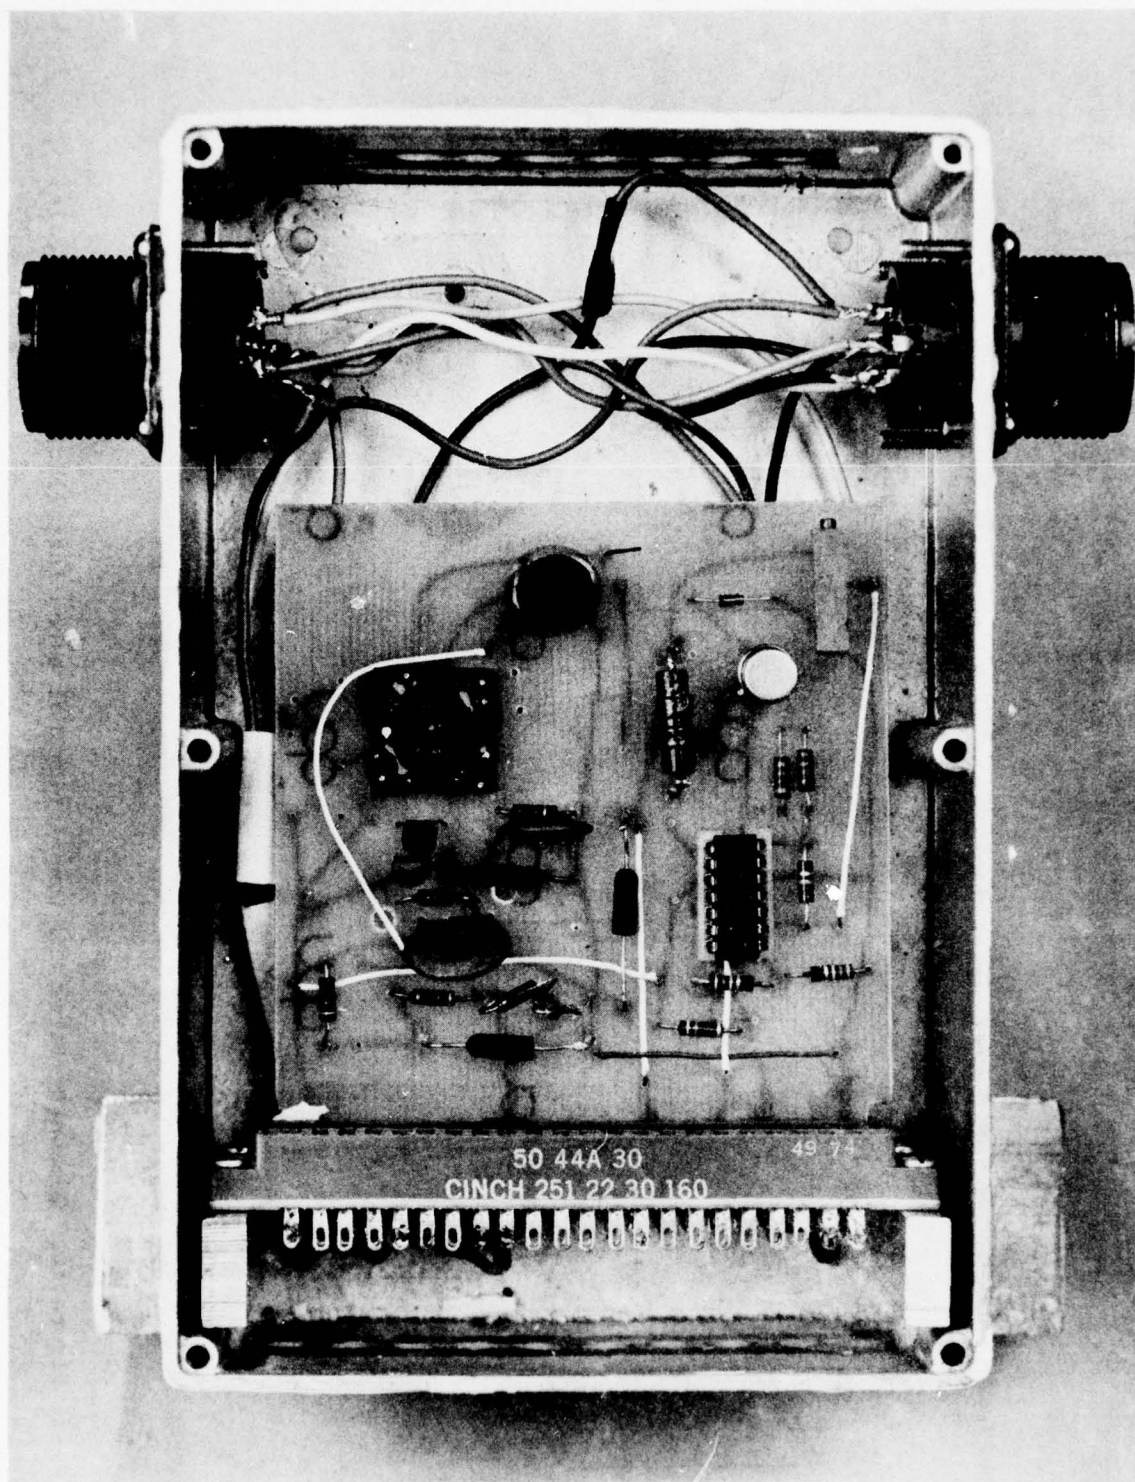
Electronics Package with Cover and Logic Circuit Board Removed. The Regulated Power Supply Board is Shown.
